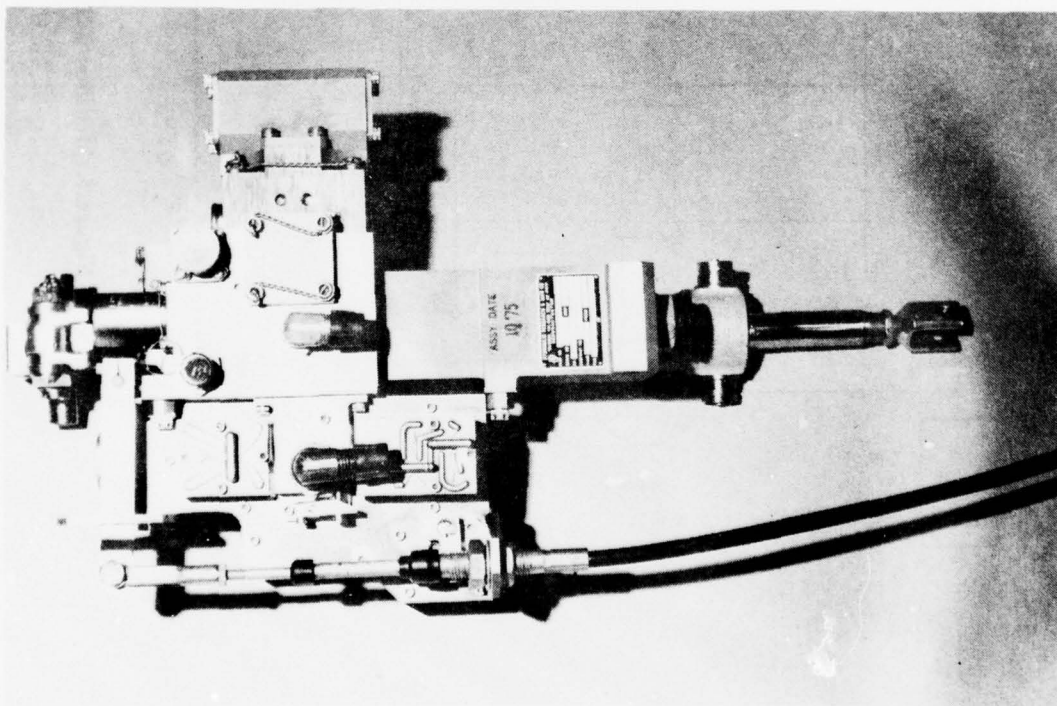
Yaw Axis Controller Servoactuator Assembly—Top View
